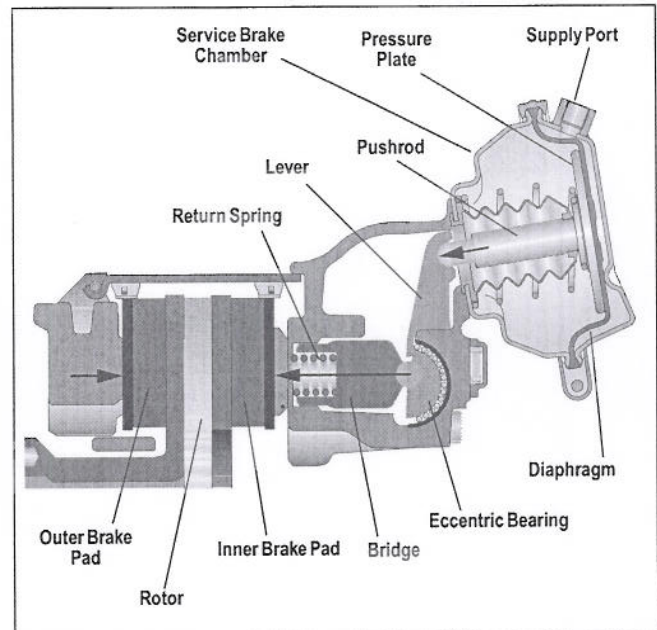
CROSS-SECTION VIEW SHOWING BRAKE OPERATION
